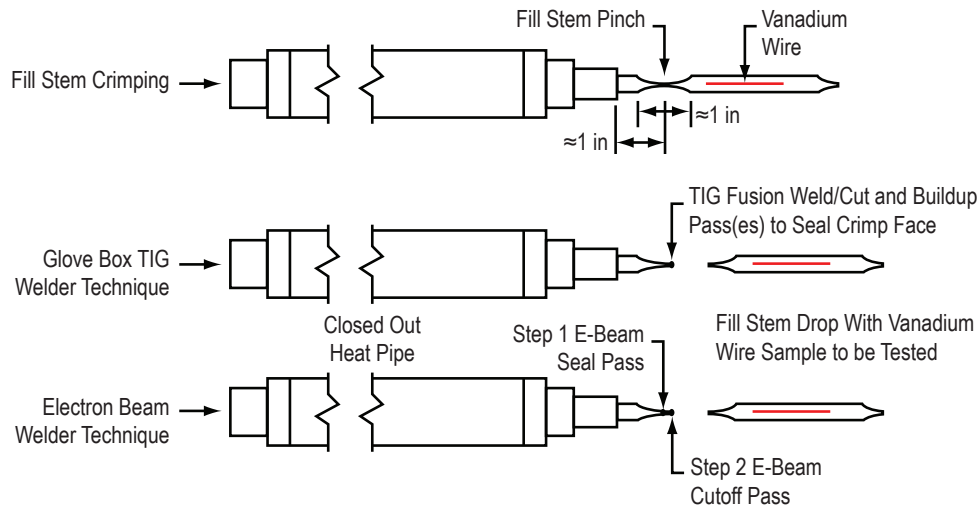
General fill stem fusion weld/cutoff techniques for the pinch method.
